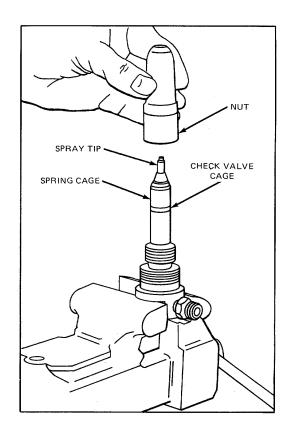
Assembling Injector Valve Parts on Tip Tester Adaptor J 23010-129
